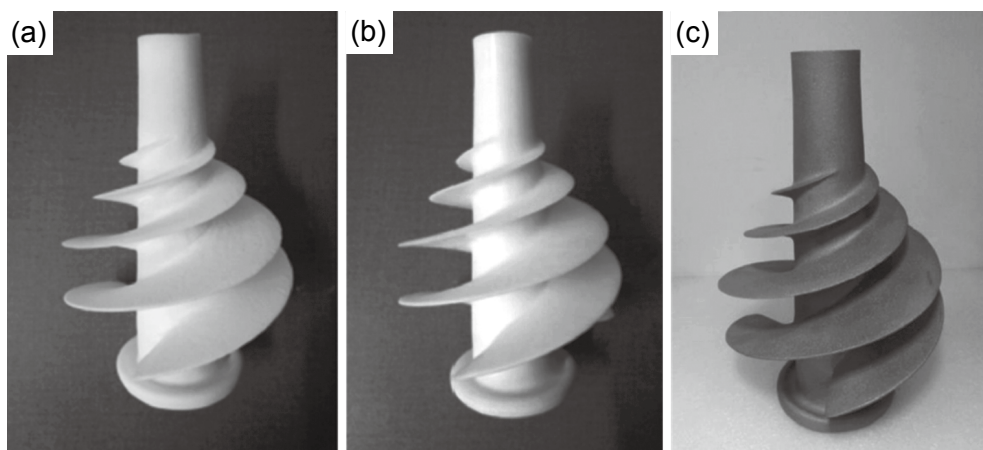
Polystyrene pattern and casting prepared by SLS: (a) polystyrene pattern; (b) paraffin treatment; (c) casting of inducer wheel [55]
